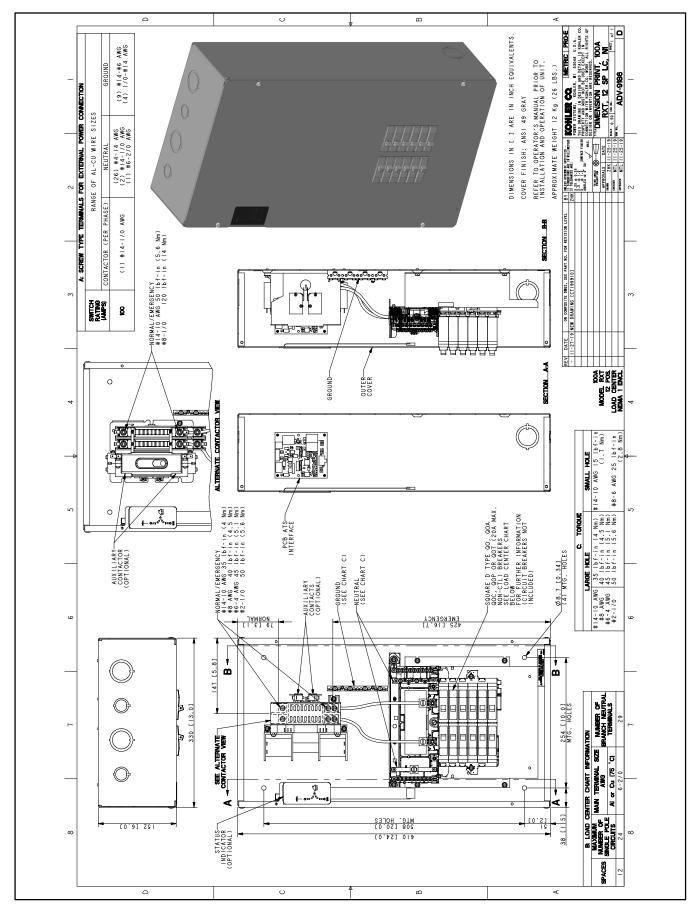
Enclosure Dimensions, 100 Amp NEMA 1 with 12-Space Load Center, ADV-9186
